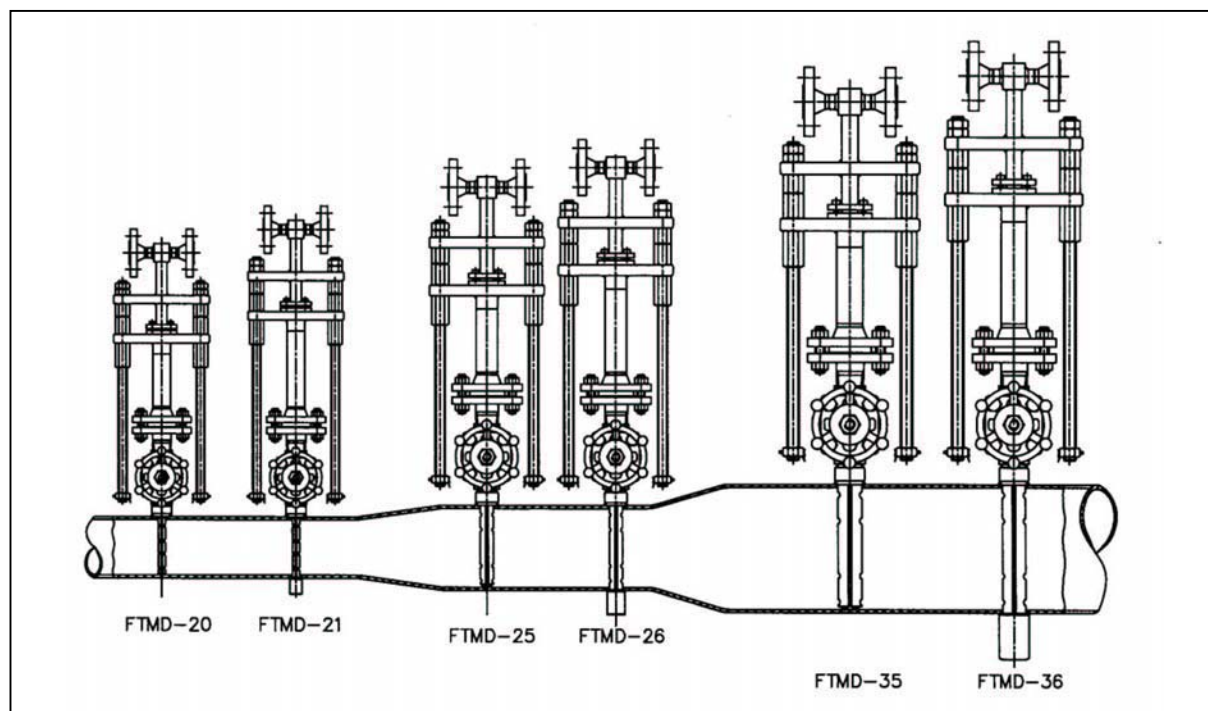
Pitot tube sensor FTMD-36 made of st. steel for pipe size ID= 336.5 mm
